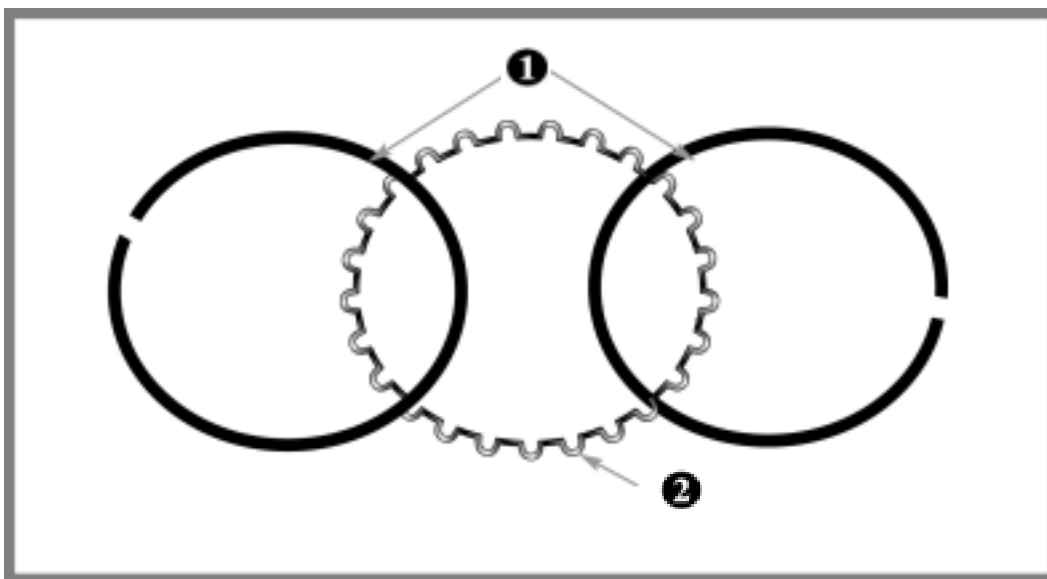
Oil rings are usually made of three pieces, or segments.
